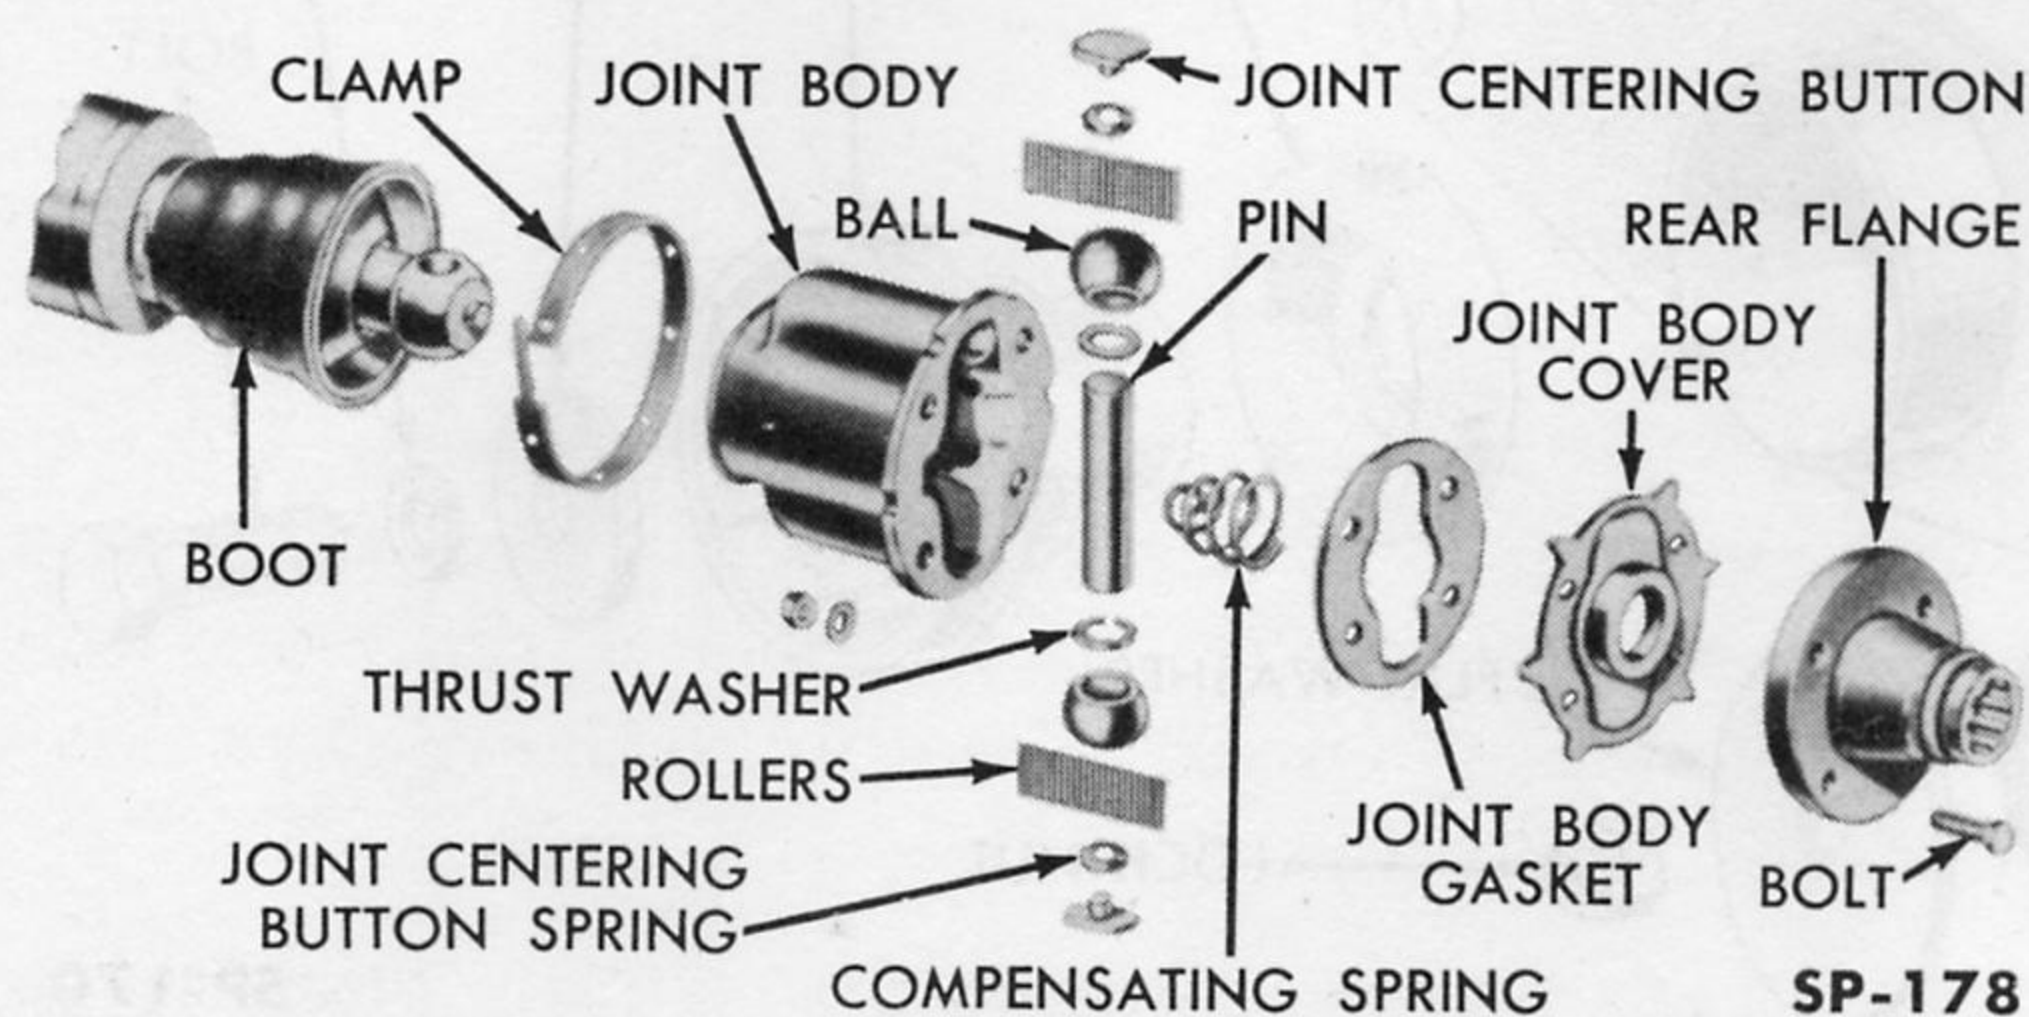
Ball and Trunnion Universal Joint—Exploded View
